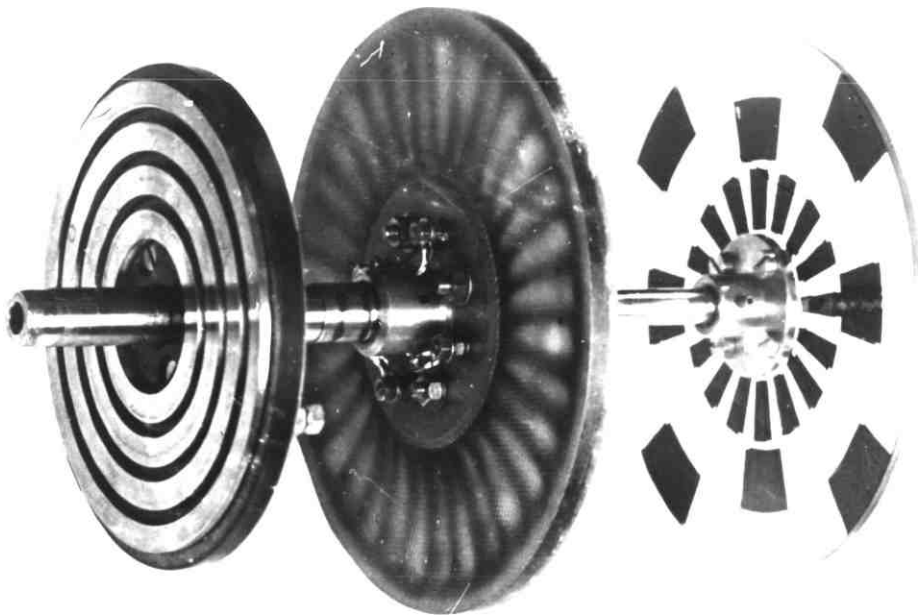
Wound rotor, sliprings and disc encoder
